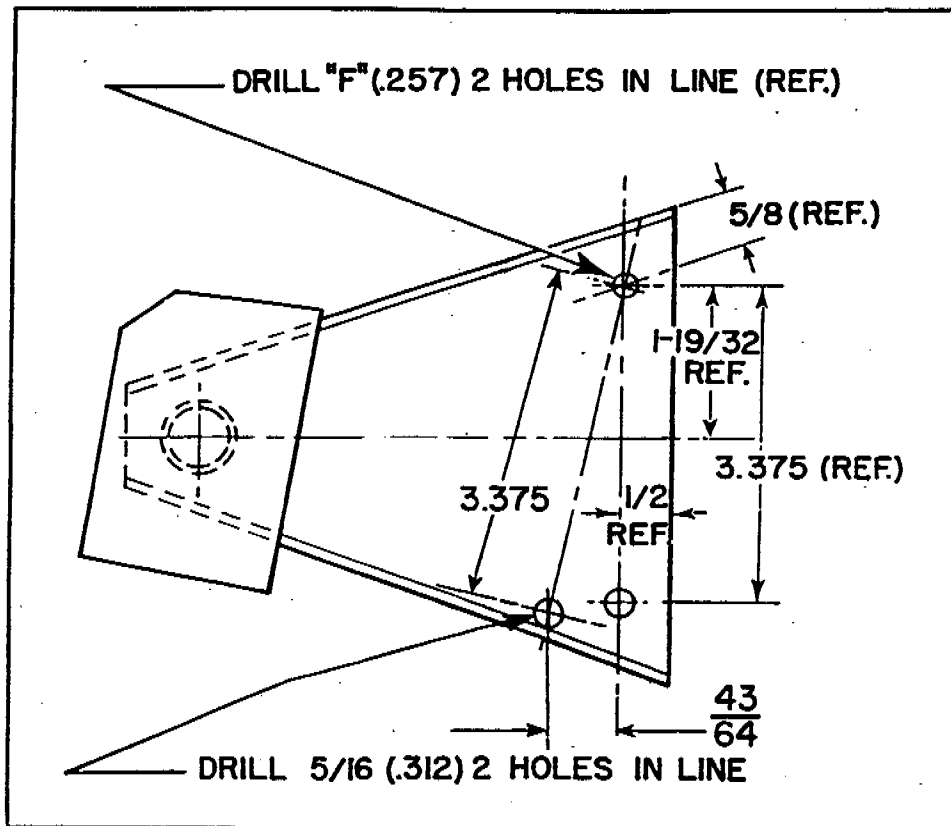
B - View Showing Location of Additional Hole to Be Drilled in the Elevator Inertia Weight Assembly for Use on P-51B, P-51C, and F-6C Airplanes if Lower Hole in Bell Crank Has Been Drilled 3-3/8 Inches From Upper Hole
